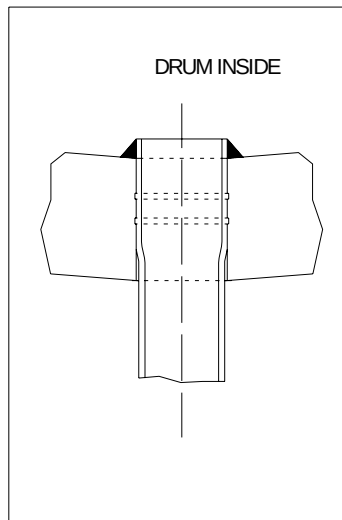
INSIDE SEAL WELD (DRUM,
